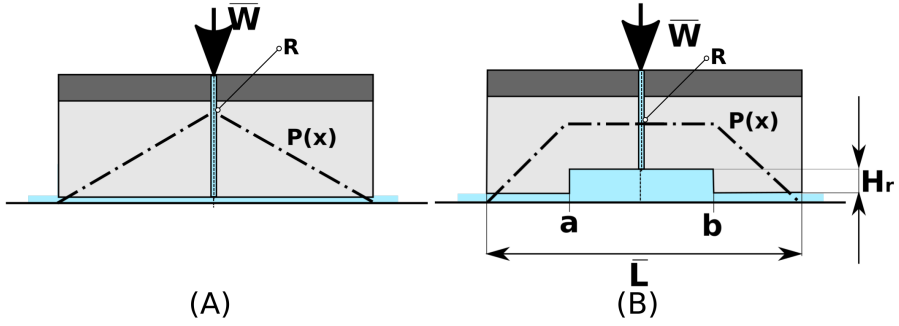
(A) Parallel hydrostatic bearing. (B) Hydrostatic bearing with recess.
